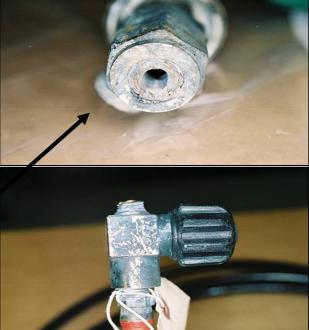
Downstream Fill Valve and CV Adaptor Fitting (Dimension Comparison of Fracture Surfaces)
